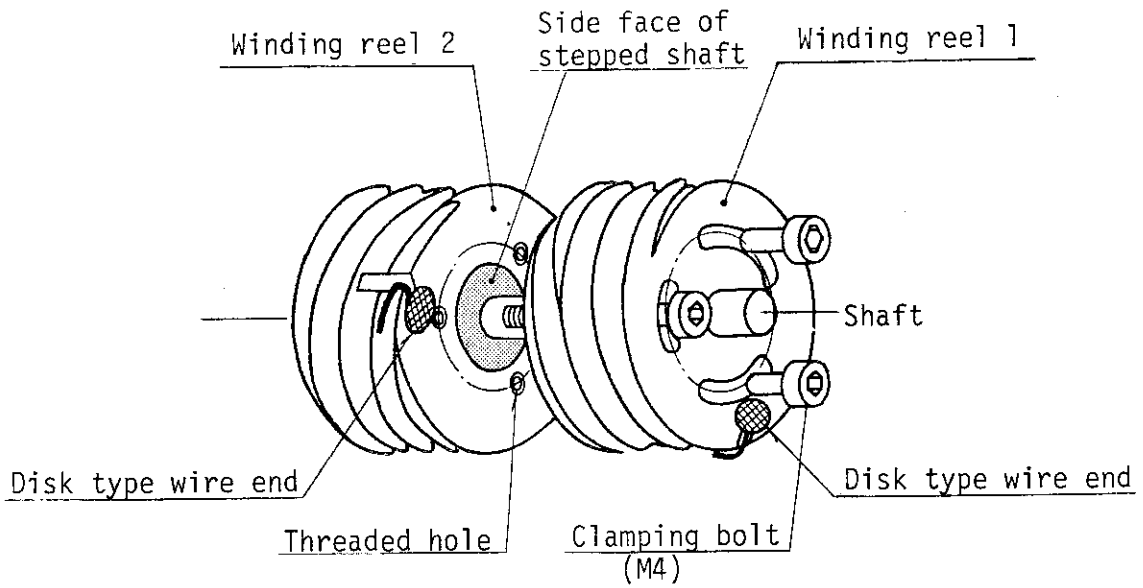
Detail of winding reels for azimuthal arm rotation to be assembled within arm shoulder
